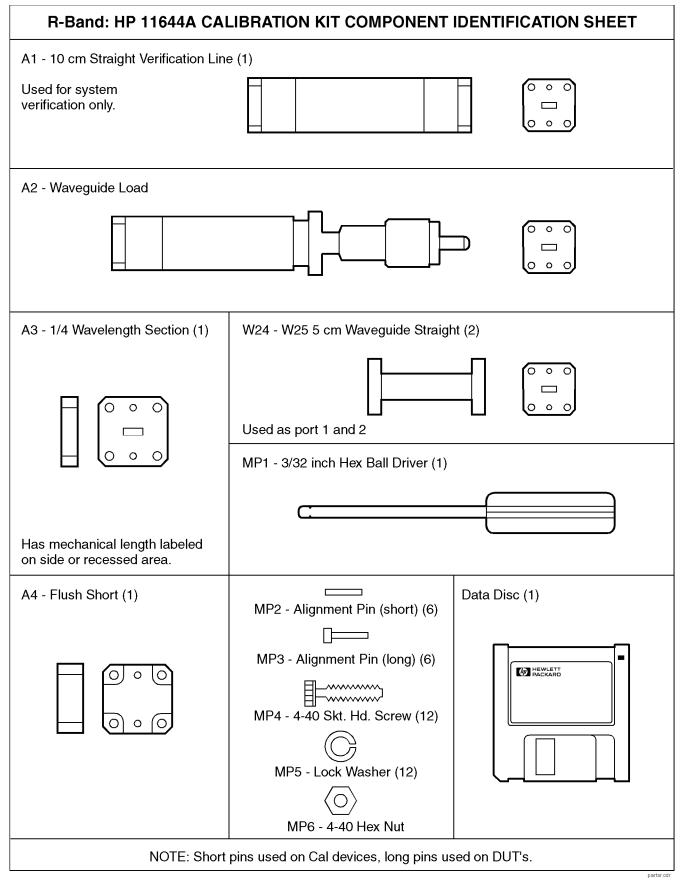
HP R11644A WR-28 Replaceable Parts
